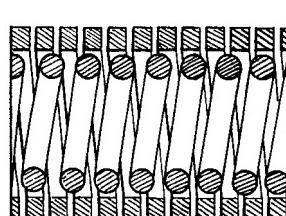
Main and Auxiliary Springs Under Tare Load only. Smaller Spring taking no Load unless Vibrations occur.
